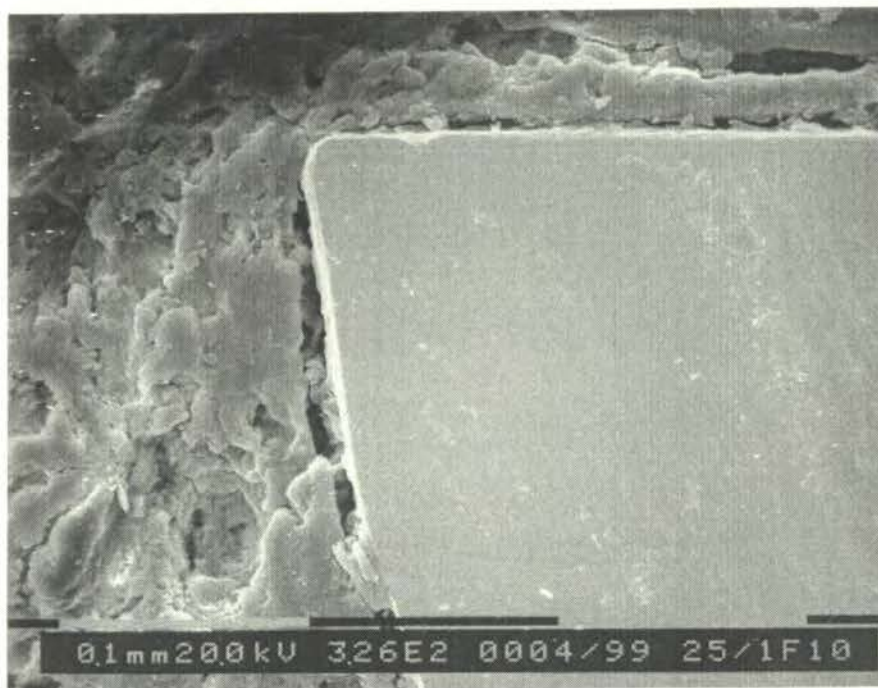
34 Sectioned KC730 tool showing smooth wear on the flank face, after cutting Waspaloy for 10 minutes at 25 m/min and 0.08 mm/tooth
